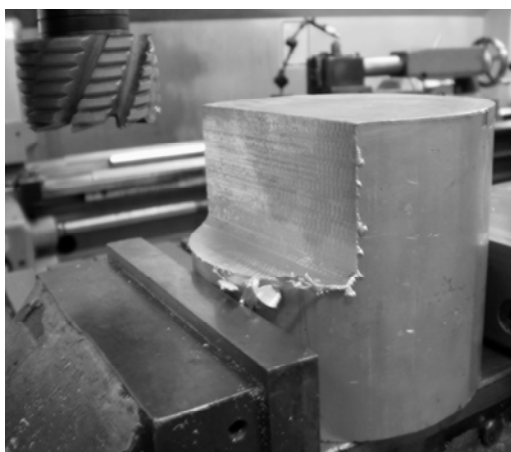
Cutting of the AlMgSi1 ingot on a milling machine
